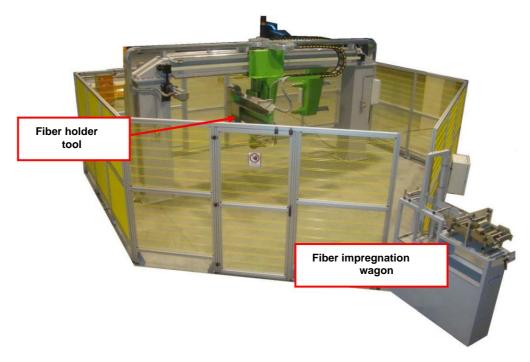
Front view of the machine - fiber holder tool/fiber impregnation carriage
